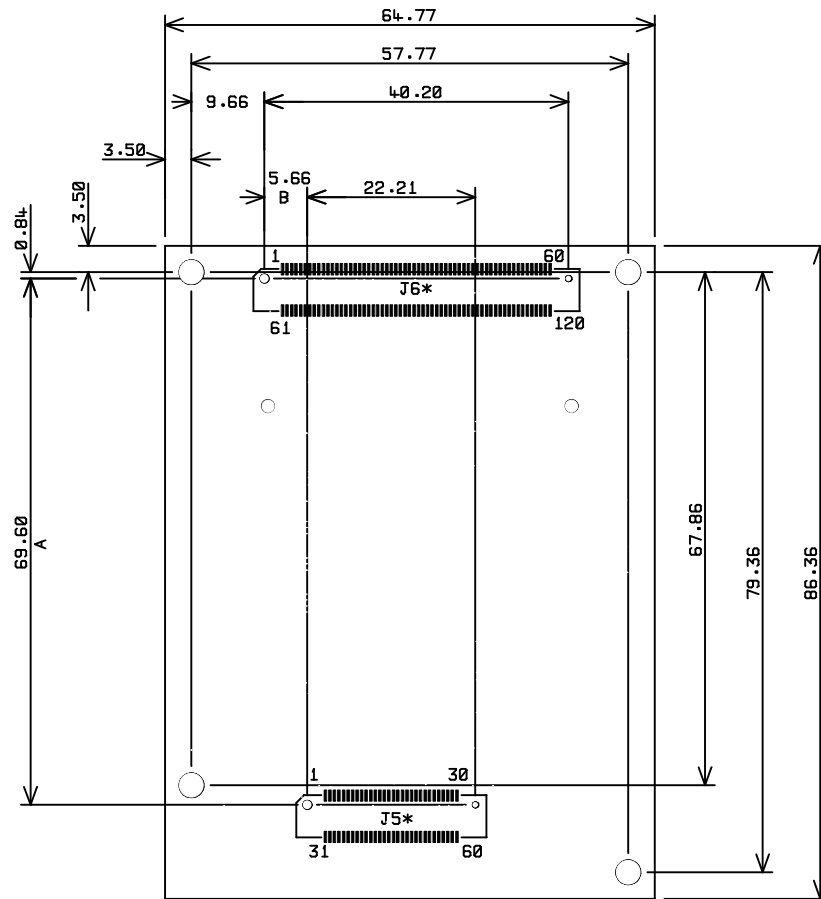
AA1100 DIMENSIONS – TOP SIDE
